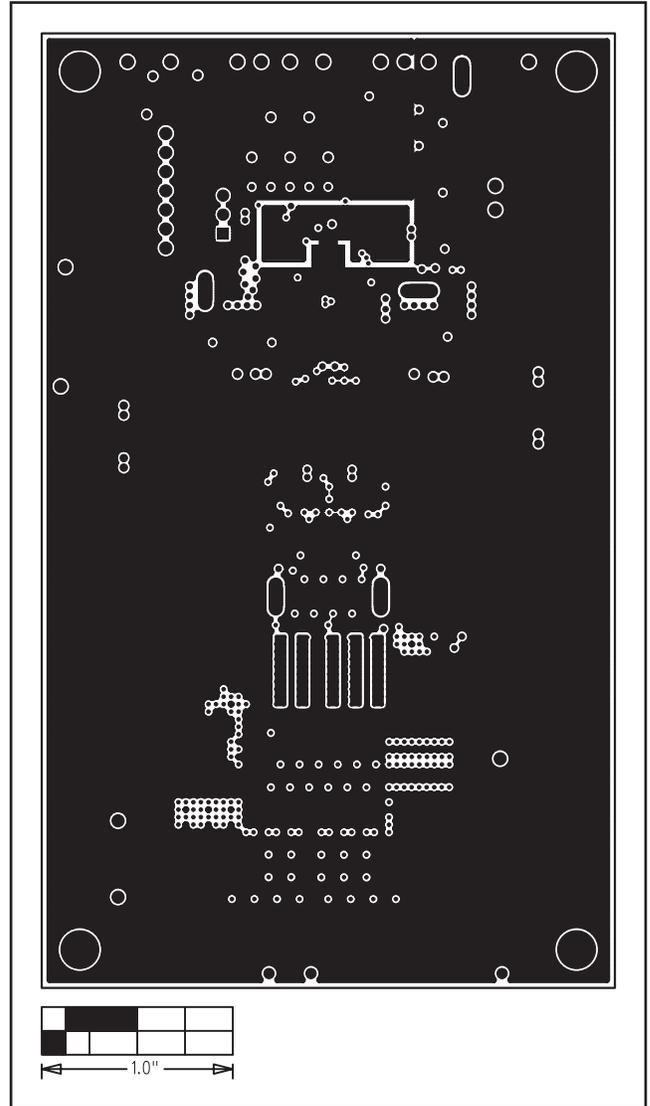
MAX17582 EV Kit PCB Layout—Internal Layer 5 (AGND/PGND Layer)
